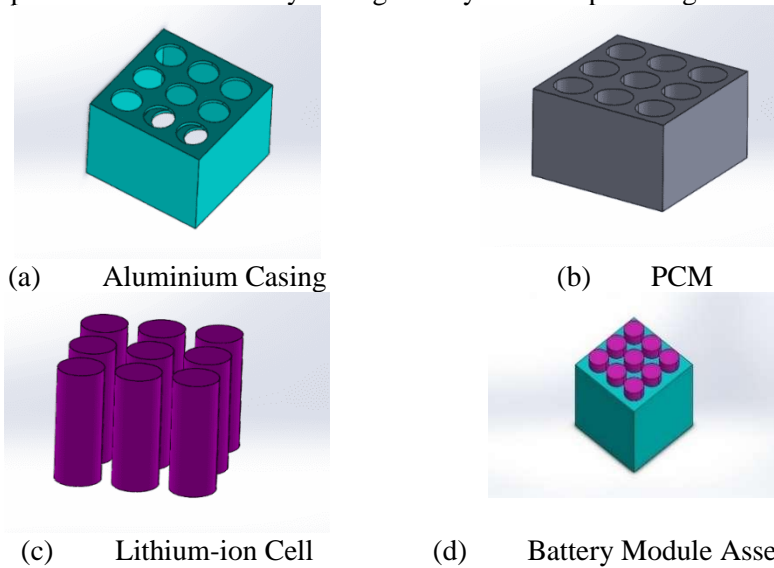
(a) Aluminium Casing (b) PCM (c) Lithium-ion Cell (d) Battery Module Assembly
